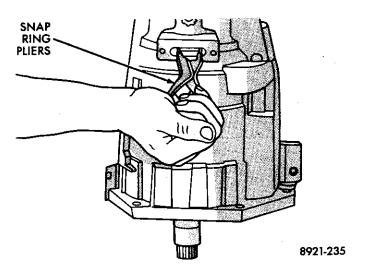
Expanding Output Shaft Bearing Snap Ring (To Remove Case From Geartrain)
